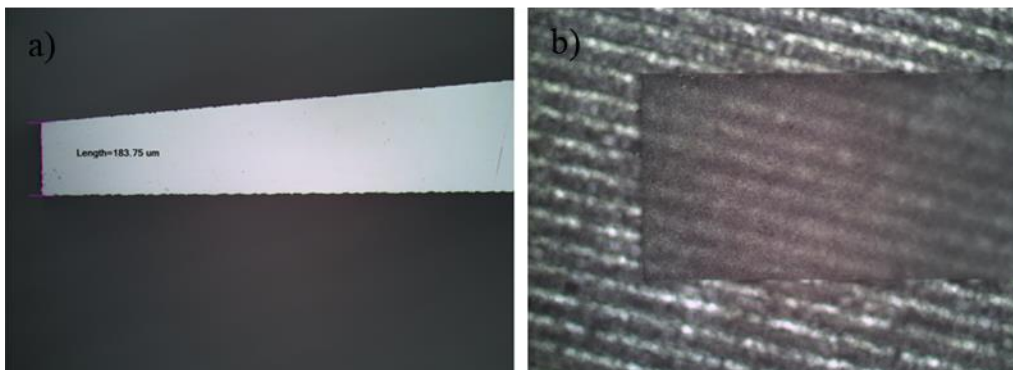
Released the tapered surface without cracks at corners a) top view, b) side view
